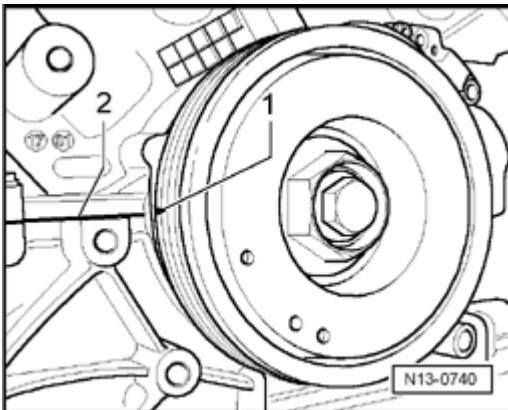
Identifying Marking Aligns With Partition Of Cylinder Block
